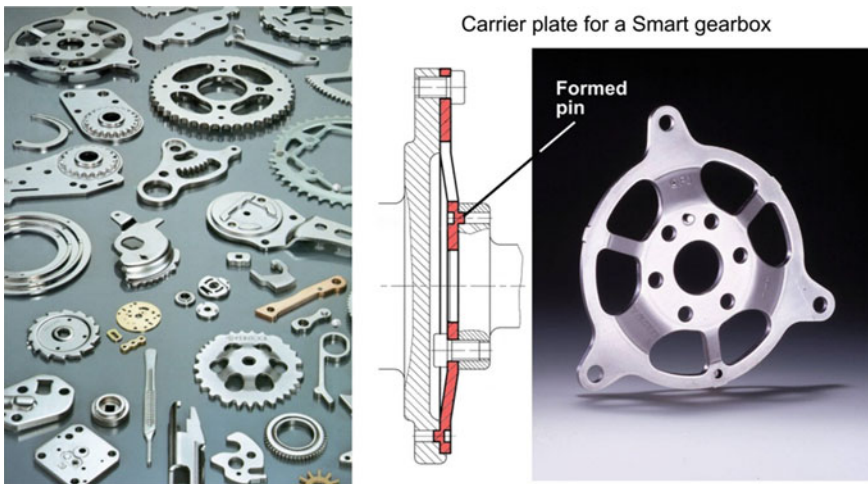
Fine-blanked parts (Source Feintool AG)
